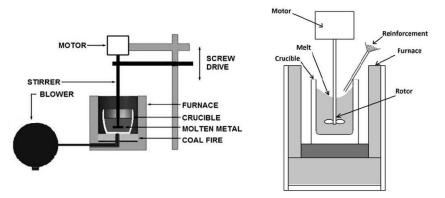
Stir casting method for producing MMCs (Rohatgi, 1991; Skibo et al., 1988).
